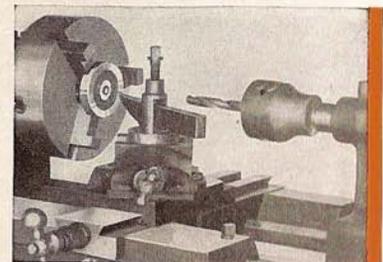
Machining the Face of a Gear Blank in the Lathe.
